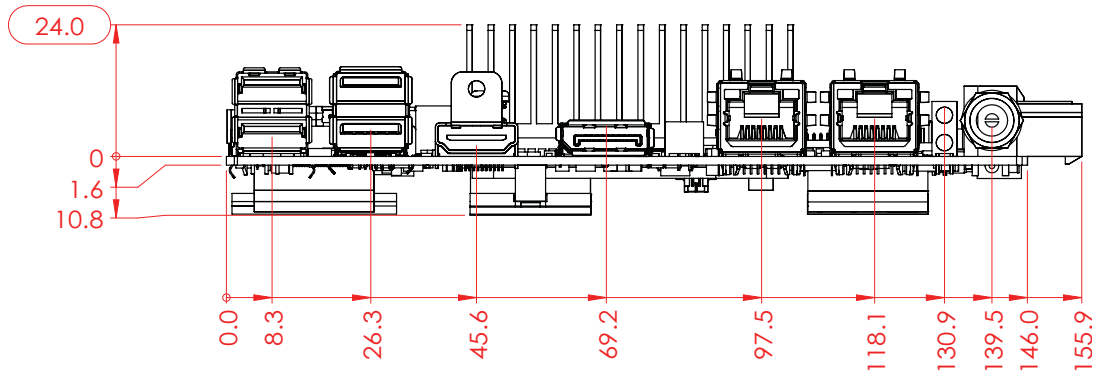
MIO-5154 Mechanical Drawing with 15W/12W CPU Heatsink (Coastline)
